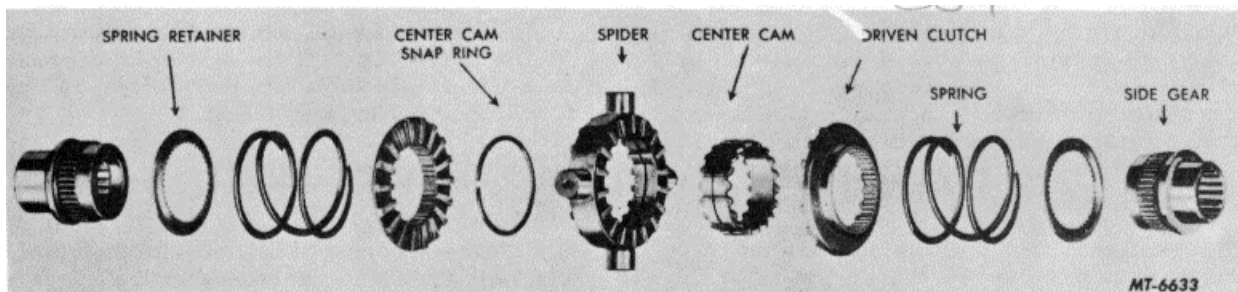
External Spring Design Differential Locking Unit (Exploded View)
